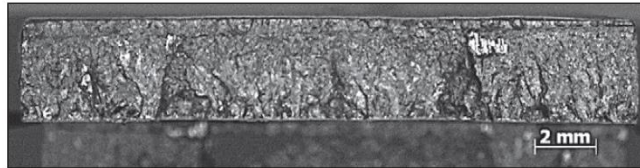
Typical fatigue fracture surface appearance.
